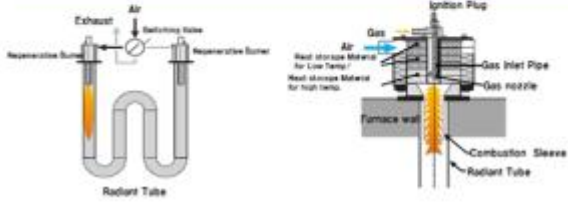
Regenerative radiant tube burner system for carburizing furnace
